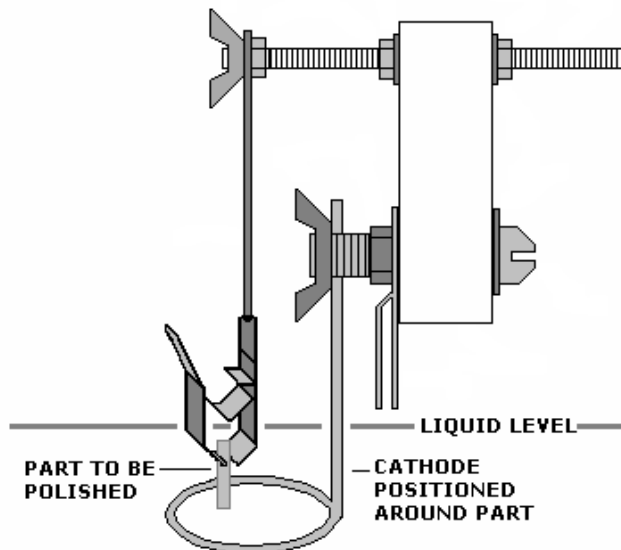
Configuration of sample holding fixture [ESMA, Inc.]
